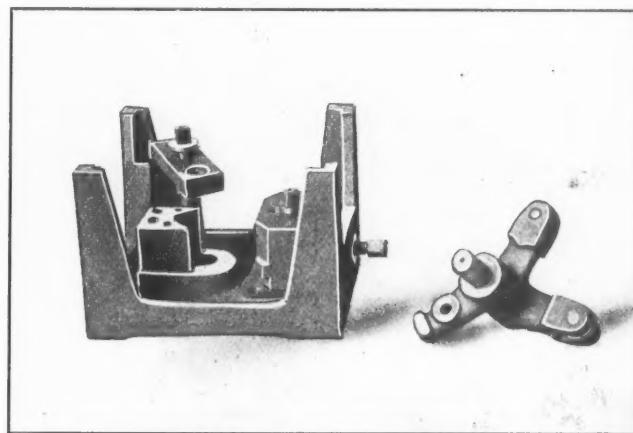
Open Drill Jig, showing Commonly Used Design.
